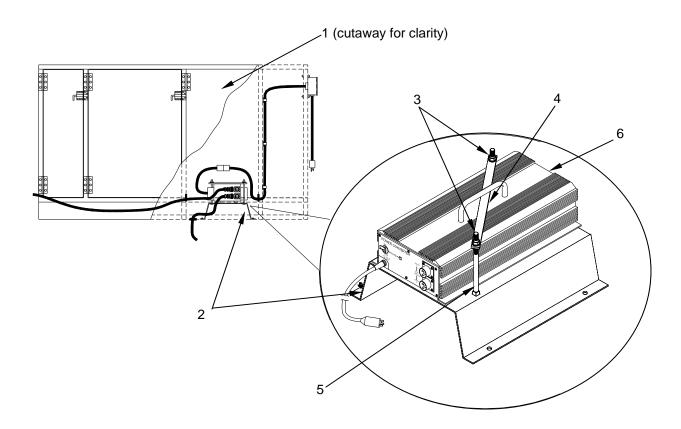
Power Converter Mounting Bracket with Power Converter Installed.
